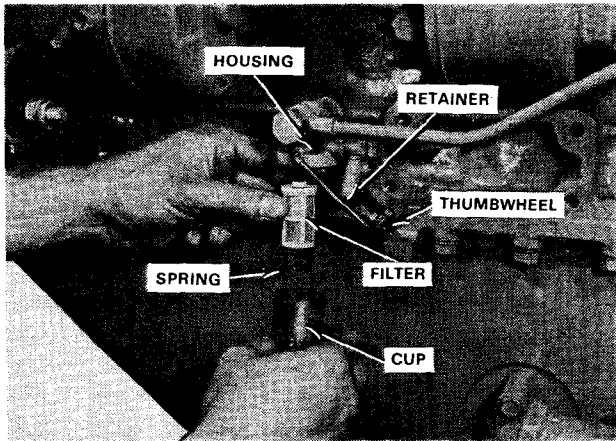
Removing Sediment Cup Filter (SSD-655)
